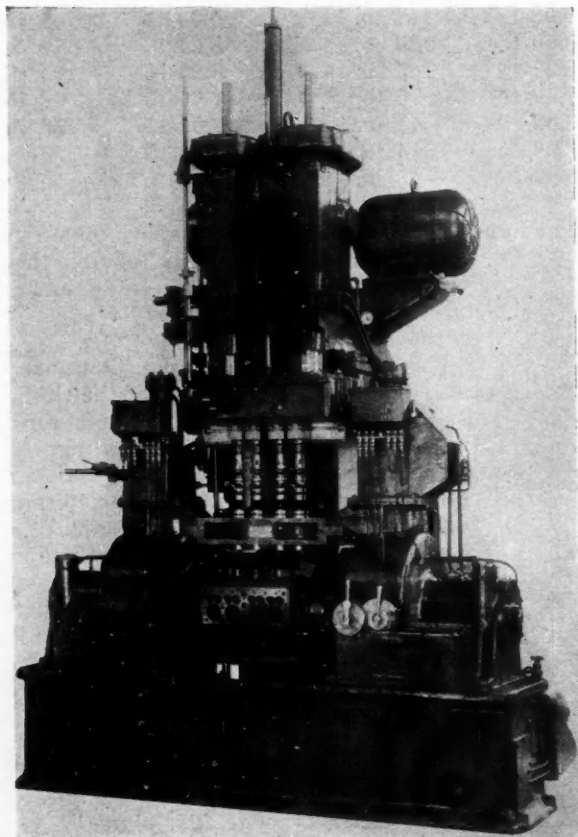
Barnes hydraulically reciprocated honing machine equipped with four Micromatic hones for finishing the bores of a popular V-8. Cylinder blocks are handled in a hydraulically operated trunnion fixture. The sizing block controlling the action of the hone is shown directly above the fixture
